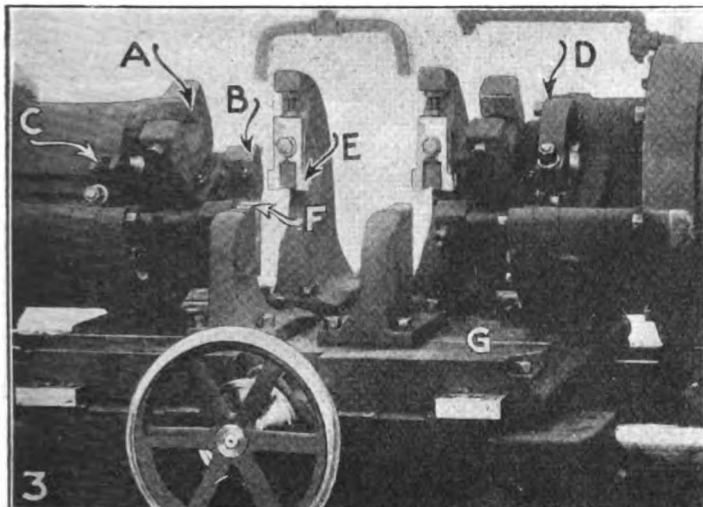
TOOLS AND CHUCKS IN CRANKSHAFT LATHE. FIG. 4. TURNING A TRACTOR CRANKSHAFT
